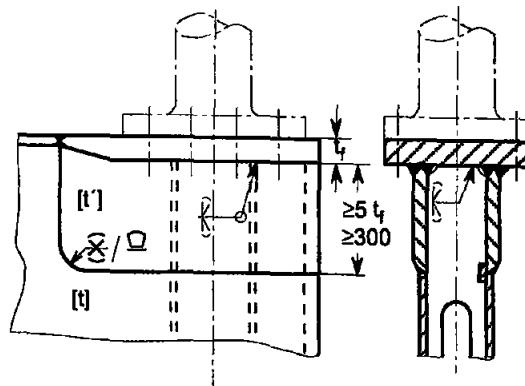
Shaft bracket without integrally cast welding flanges
